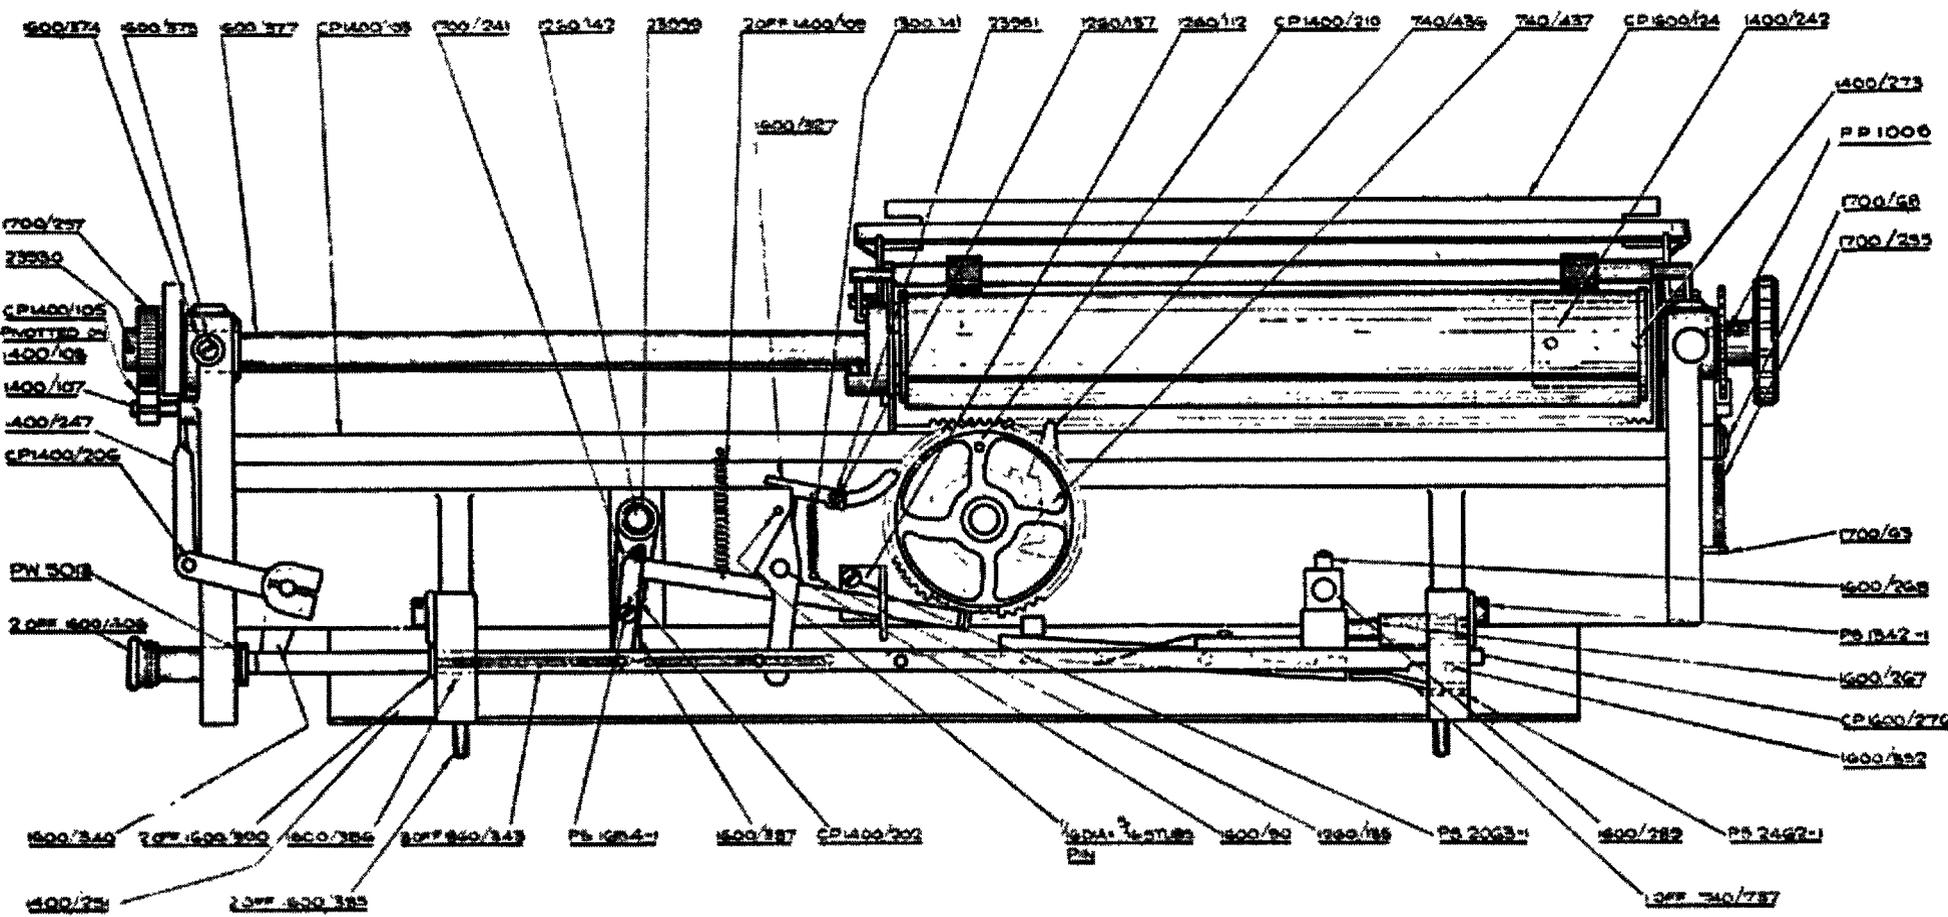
MORSE PAGE PRINTER CARRIAGE ASSEMBLY (Elevation).
